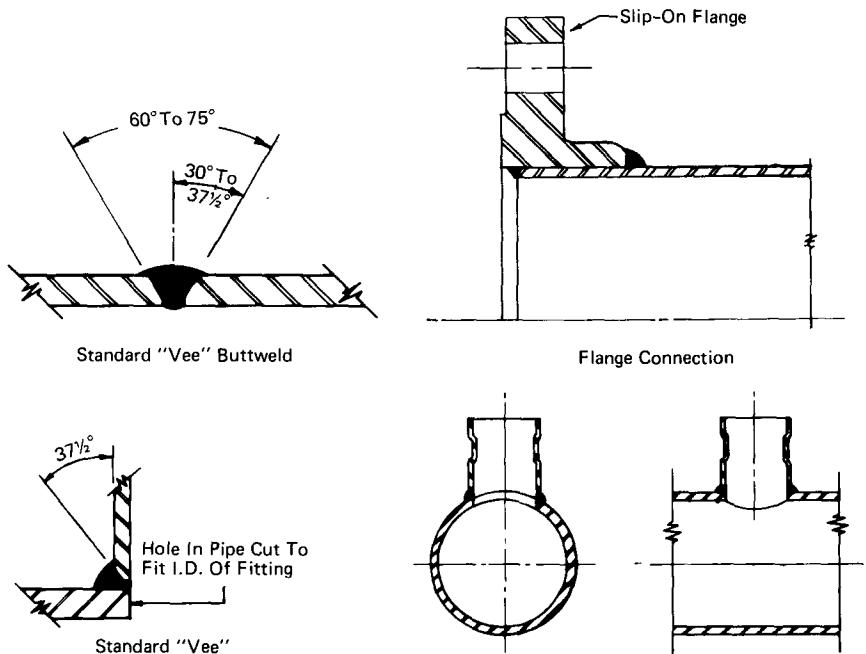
(a) Acceptable weld joints.
